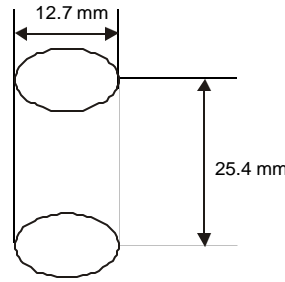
Test specimen Fig. 4(a) Prodigy plus FDM Machine.
